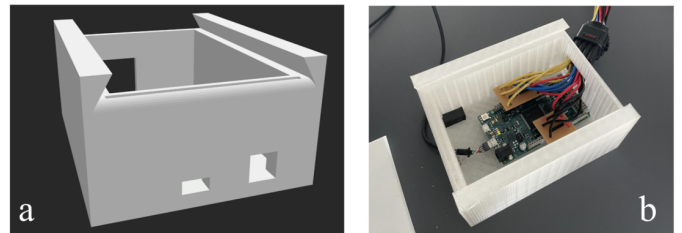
a) 3D box designed using Fusion360 b) 3D box printed to store microcontroller and components
